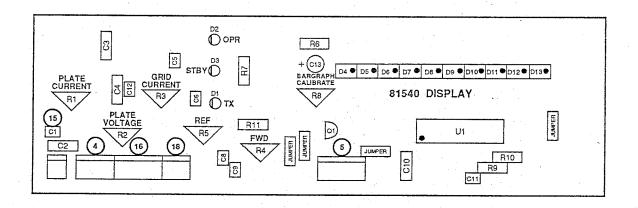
81540 DISPLAY BOARD COMPONENT LAYOUT
